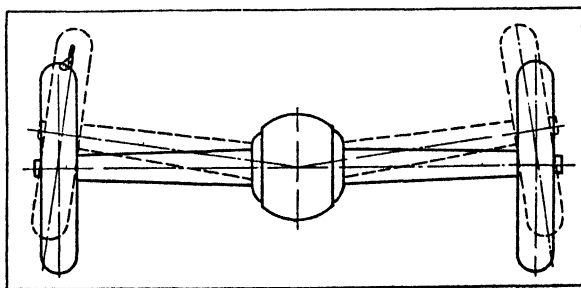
SHOWING CHANGES OF TREAD WITH SWINGING AXLES.
